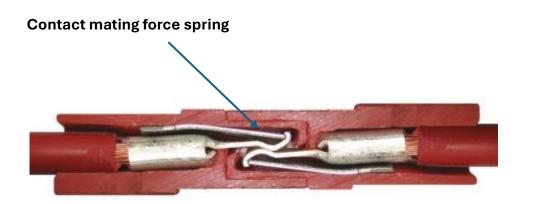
Cutaway view of correct mating position of contacts inside of housing
